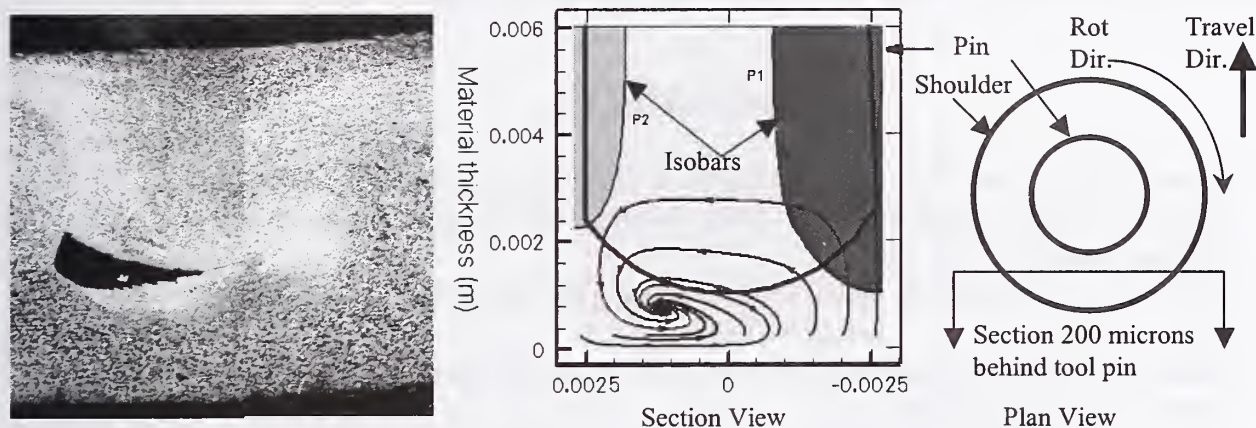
3-D Model and Corresponding Weld Cross-Section using Smooth Tool
